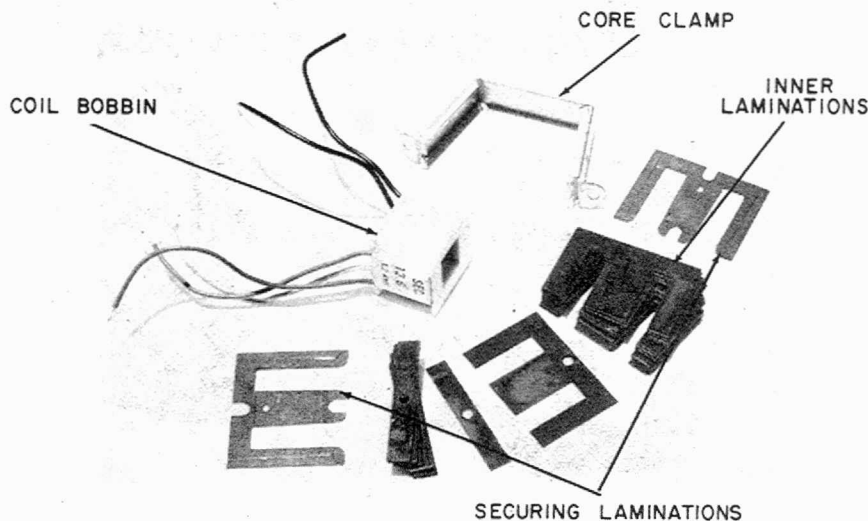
Transformer is completely disassembled here. The coil assembly has been removed and is ready to be rewound. Be sure to make a diagram of the relative position of the laminations so they can be fitted back together again. Failure to do so will result in having extra pieces left over!
